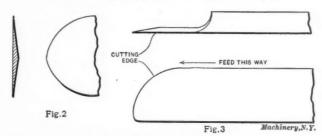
Double-edged Tool for Turning Soft Rubber. Fig. 3. Cuttingoff Tool for Soft Rubber.
